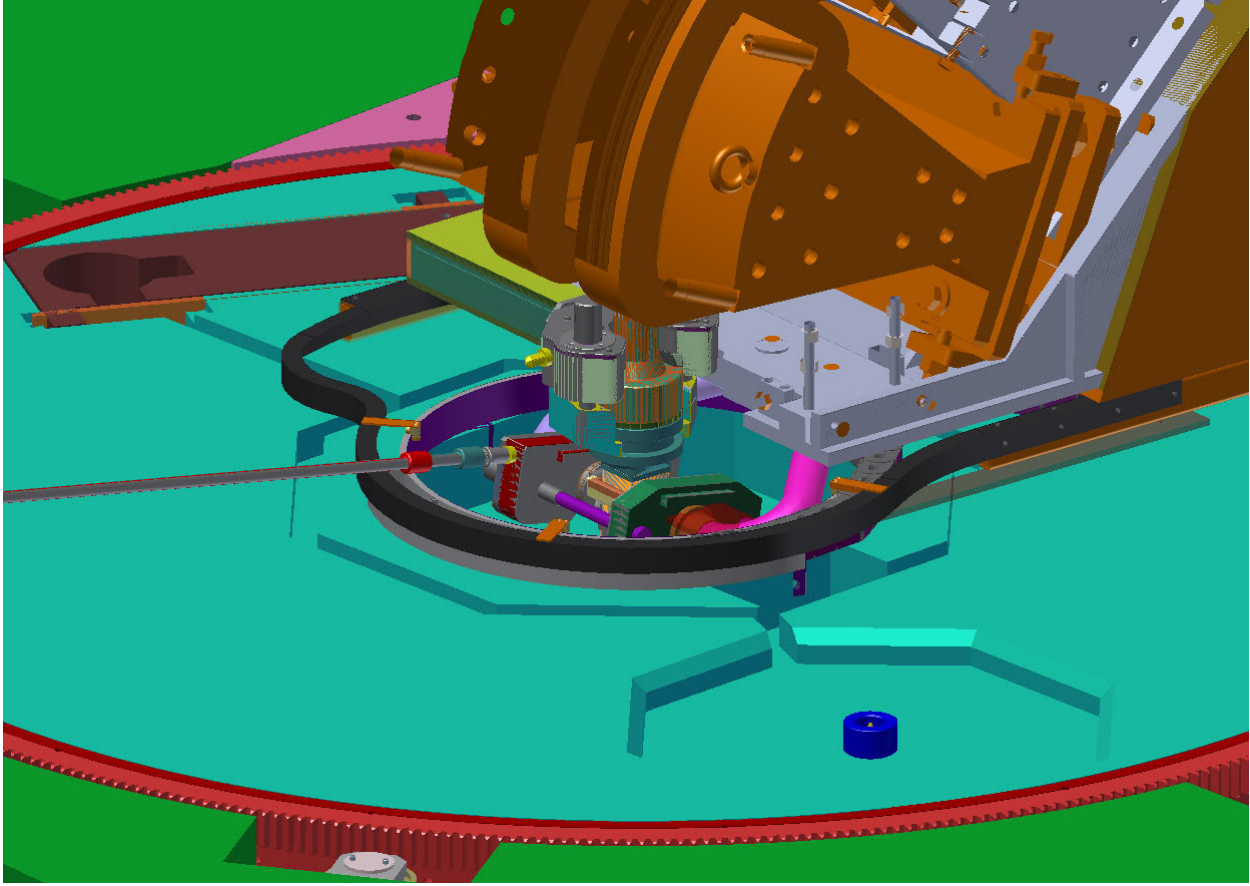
Top of the target assembly as installed in SCA shows the arrangement of vacuum clamp and coolant clamp assemblies.
